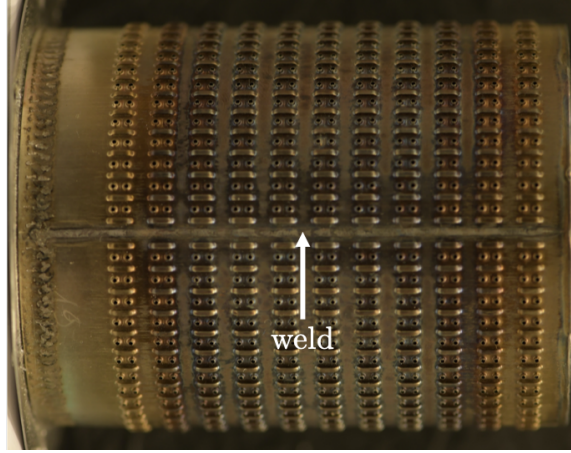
Side view of the cylindrical burner. The weld is visible at the center.
